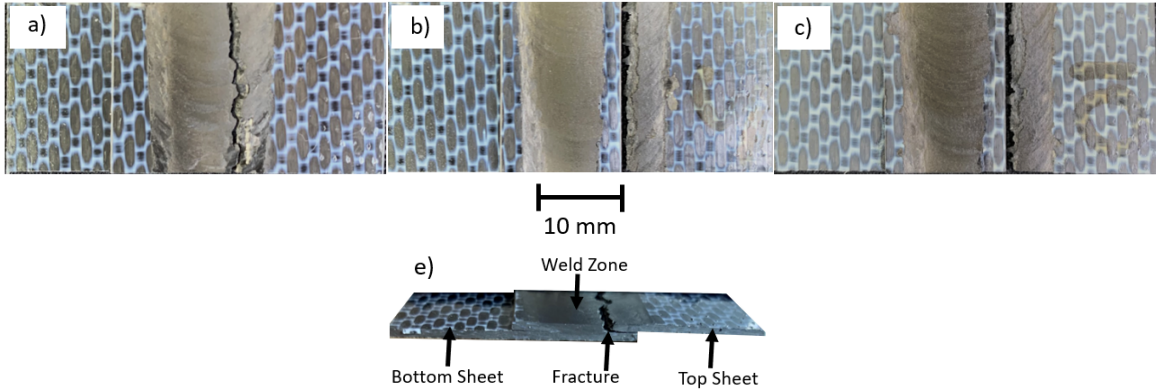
Fracture location of single lap shear specimens. a) A1 b) A2 c) A3 e) Cross view of typical fracture specimen.
